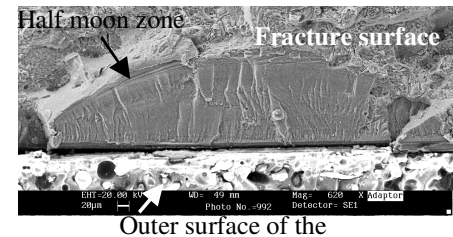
SEM images showing presence of half moon zones on the fracture surface at locations close to the adapter outer surface
